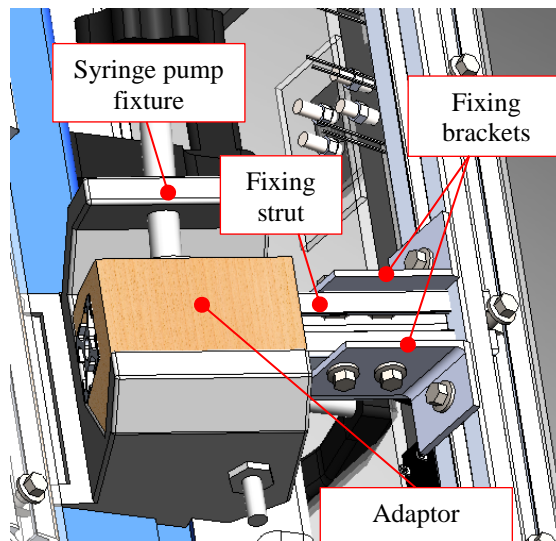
Syringe pump bracket set-up CAD model rendering
